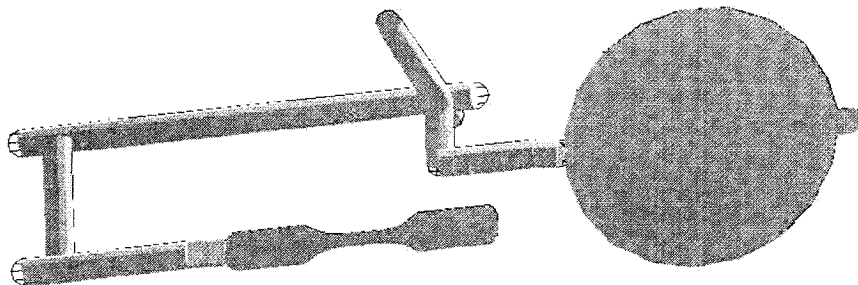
ASTM mold composed of specimens for impact and tensile tests.
